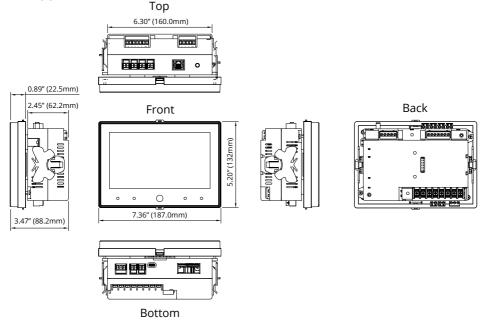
Acuvim 3 Panel Mount Appearance and Dimensions
